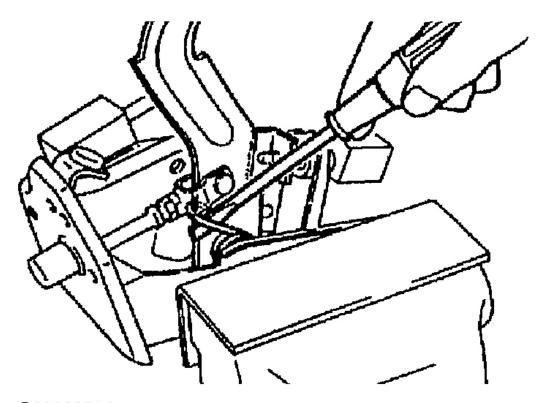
Removing Clutch Pedal Courtesy of MAZDA MOTORS CORP.
